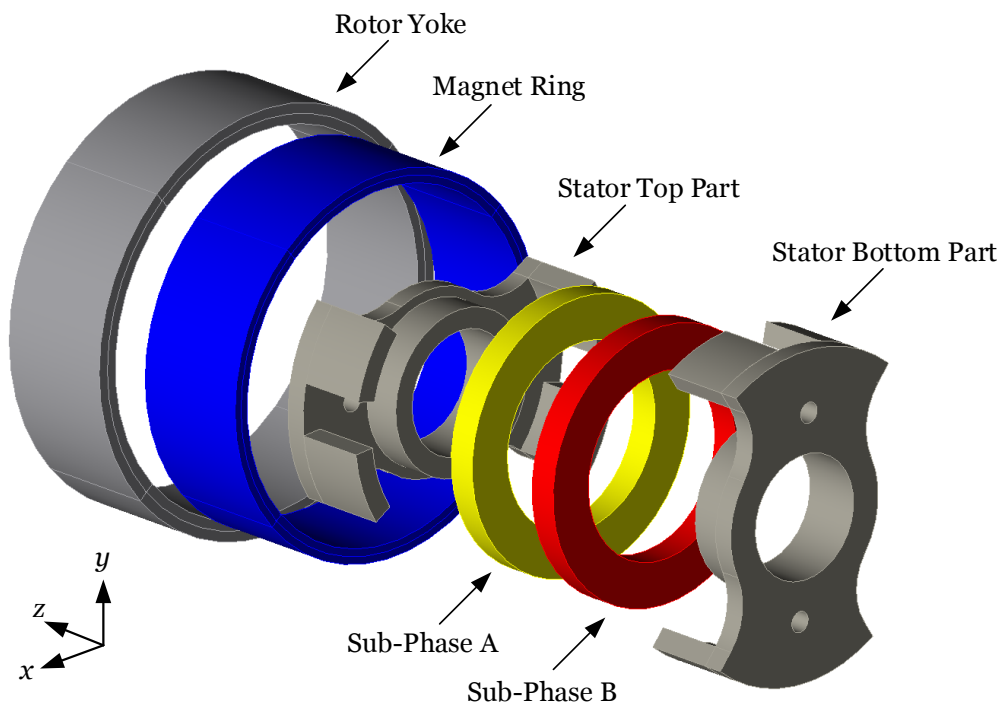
3-D exploded view of *Design 1* which features claw-poles with a single-sided skew; visualized with JMAG<sup>®</sup> [91].
